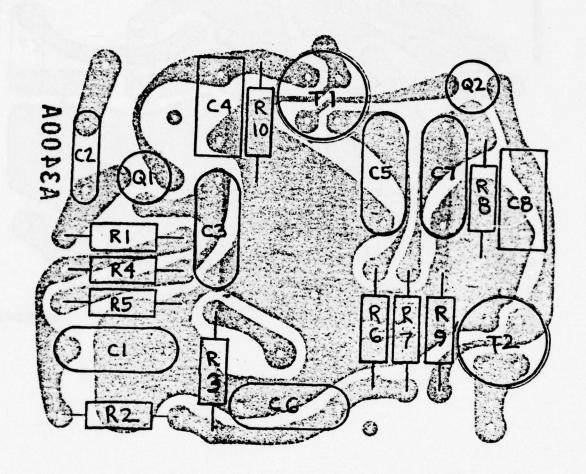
P.C. BOARD LAYOUT FOR THE A3400A CRS FIRST AND SECOND IF AMPLIFIER ASSEMBLY
